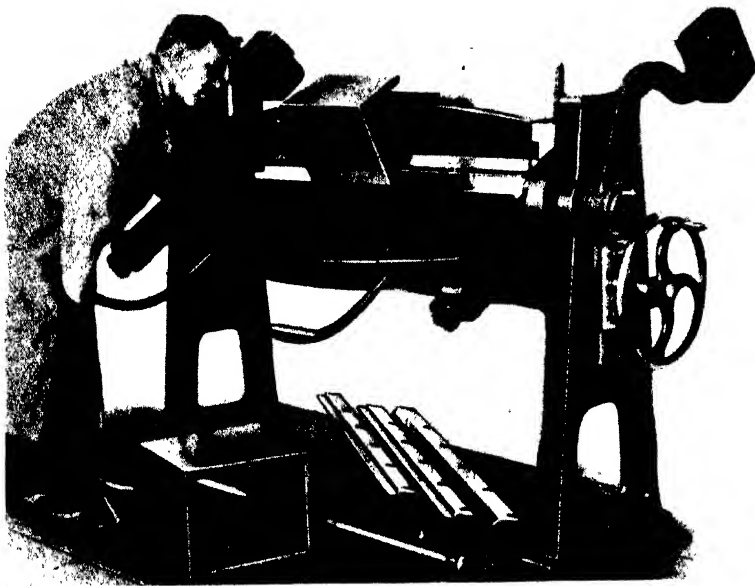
UNIVERSAL SWING-BEAM FOLDING AND BENDING MACHINE
